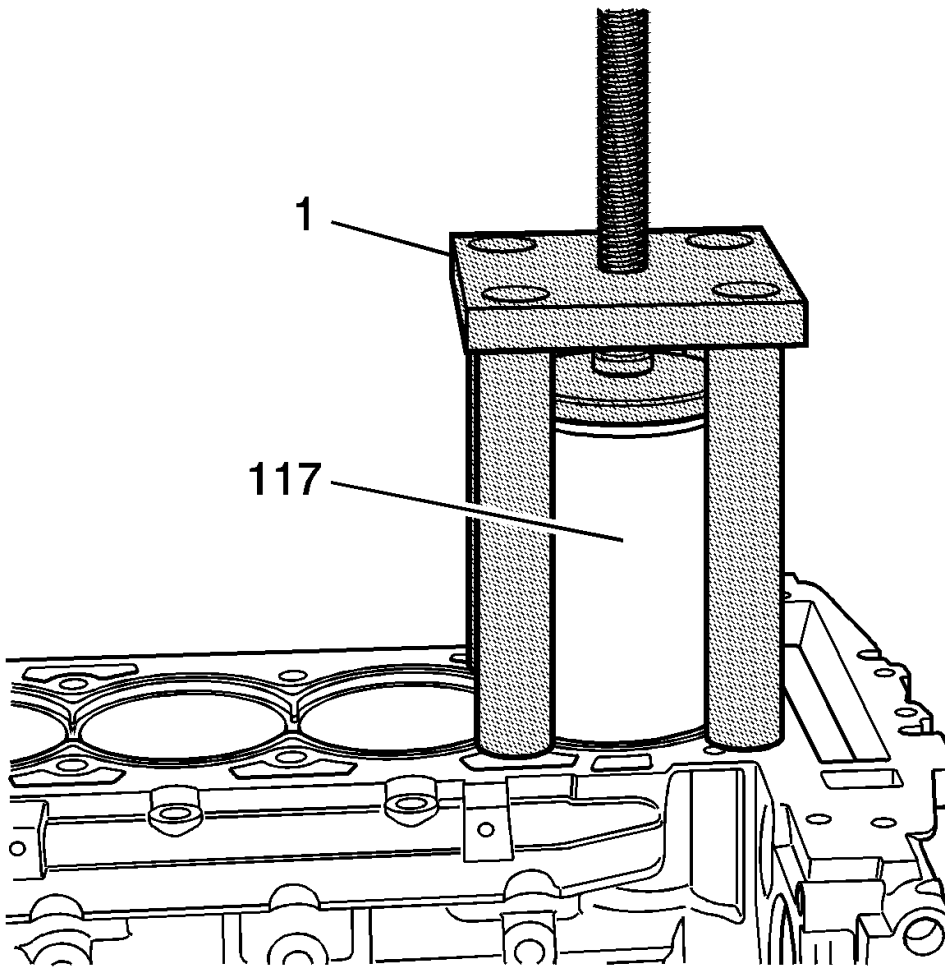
View Of Cylinder Bore Sleeve Fixture
